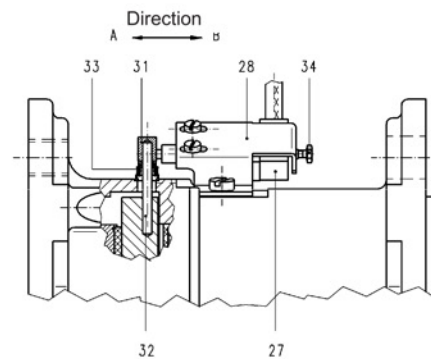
/2: Microswitch installation on spring-applied single-disc brake module 77 500..B15
